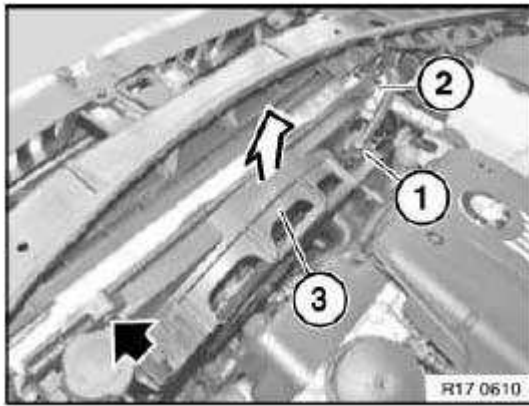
Removing Electric Fan, Expander Rivet And Plug
